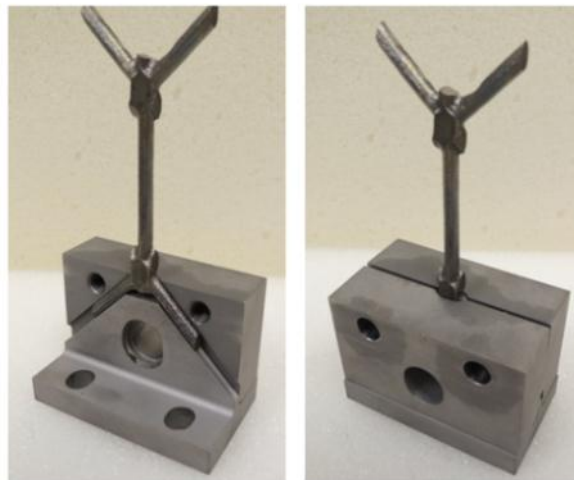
Machined and Heat Treated Vertical Specimen Fixture
